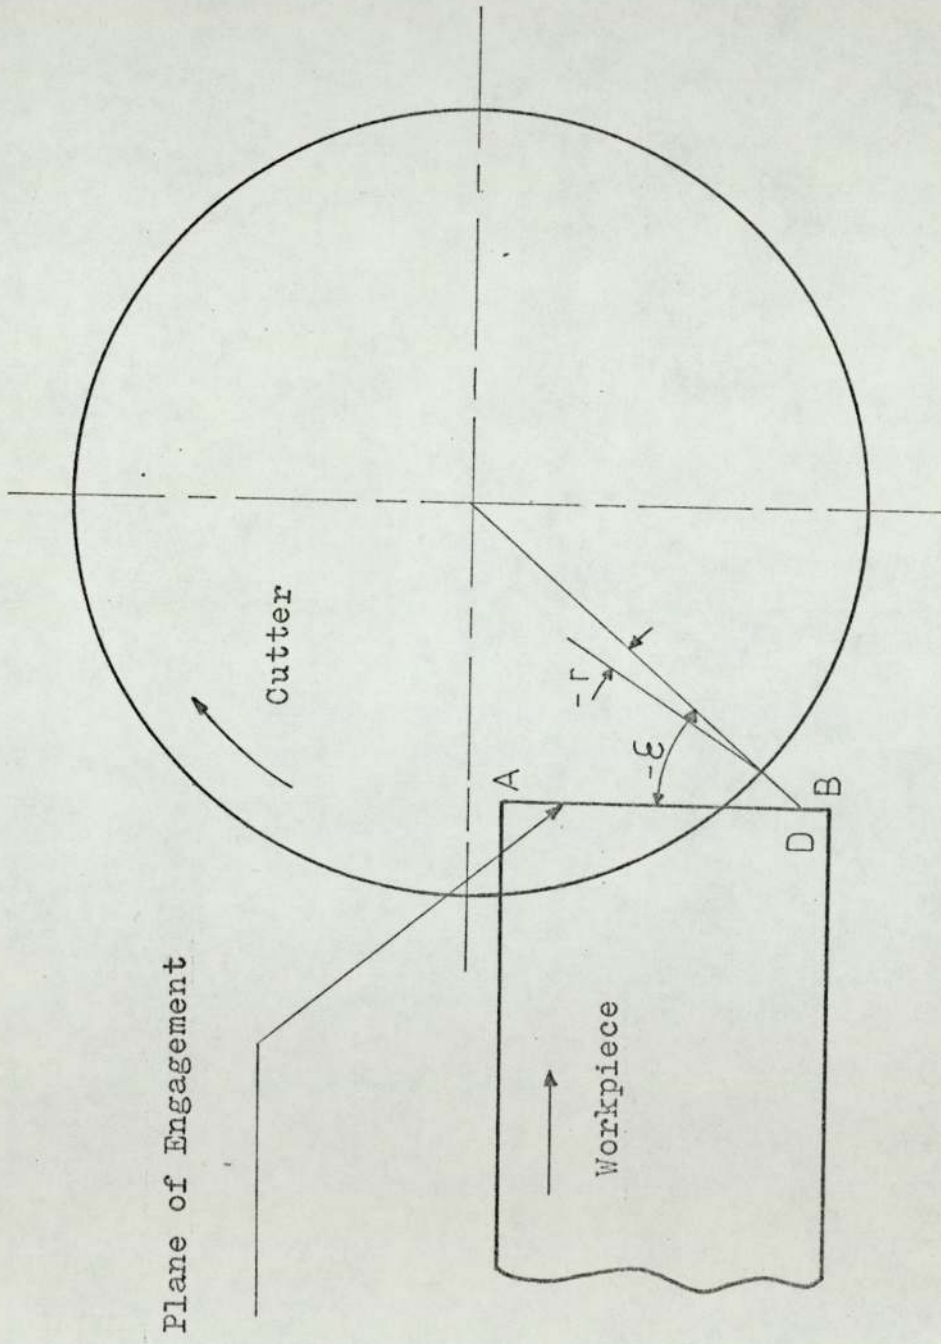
The Intersection Angle i' in Up-Cut Milling using the Walter Cutter
